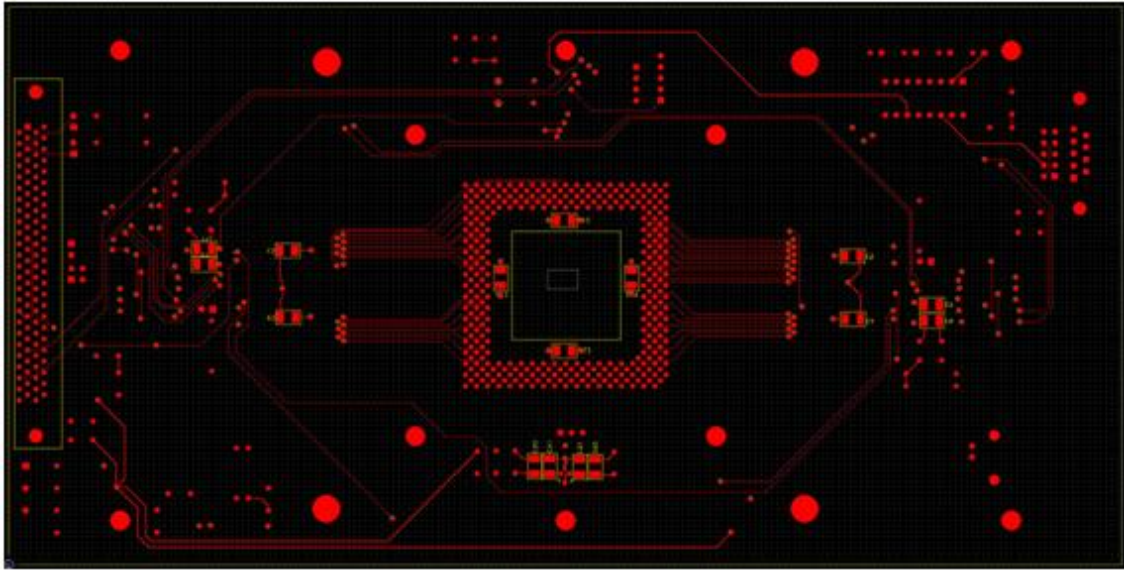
Bottom layer. Layer showing board tracks routed on the bottom part of the board.
